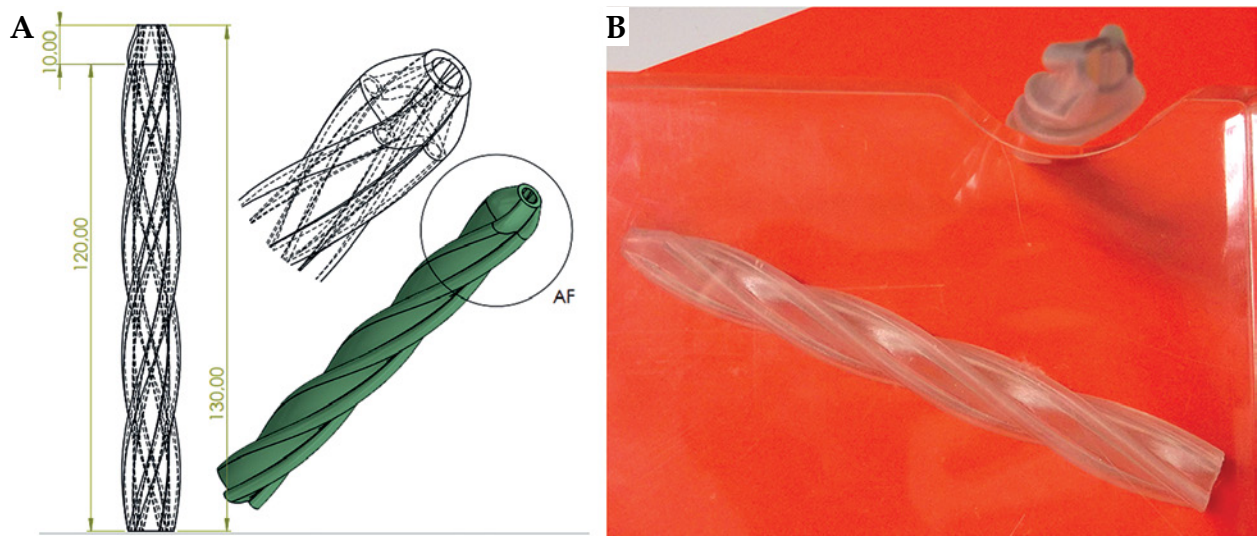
A) Design rendering of the corpus; B) 3D-printed corpus
